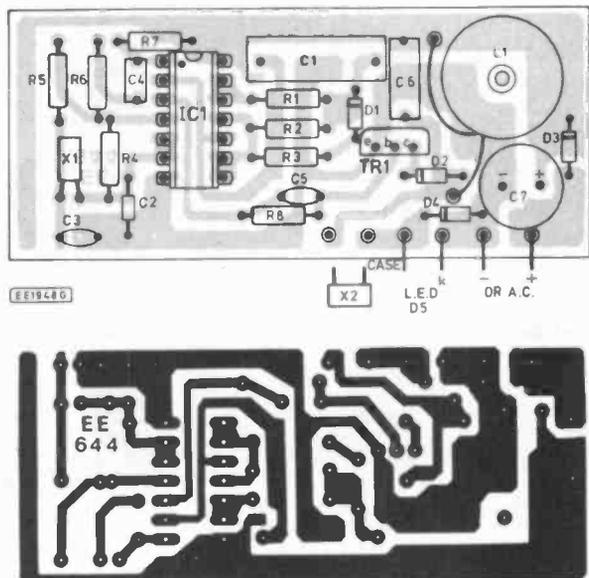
P.C.B. layout and wiring for the Pet Scarer.
